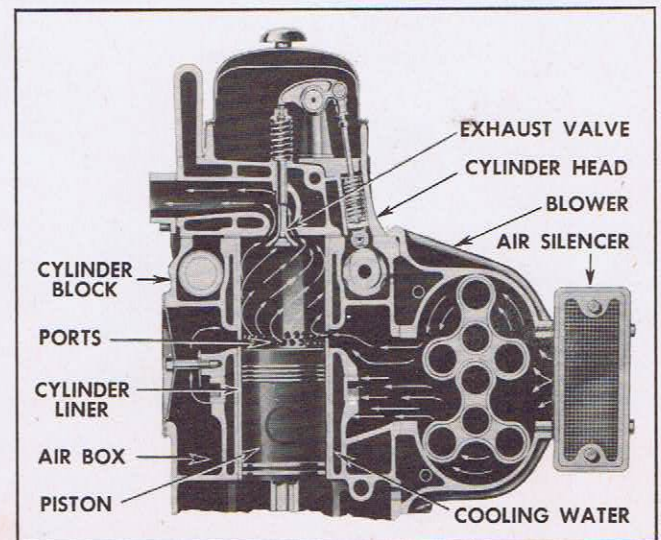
AIR INTAKE SYSTEM THROUGH BLOWER AND ENGINE.
